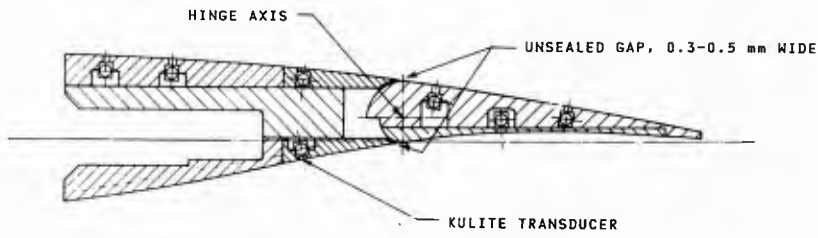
Aileron geometry in cross-section at wing section 14
